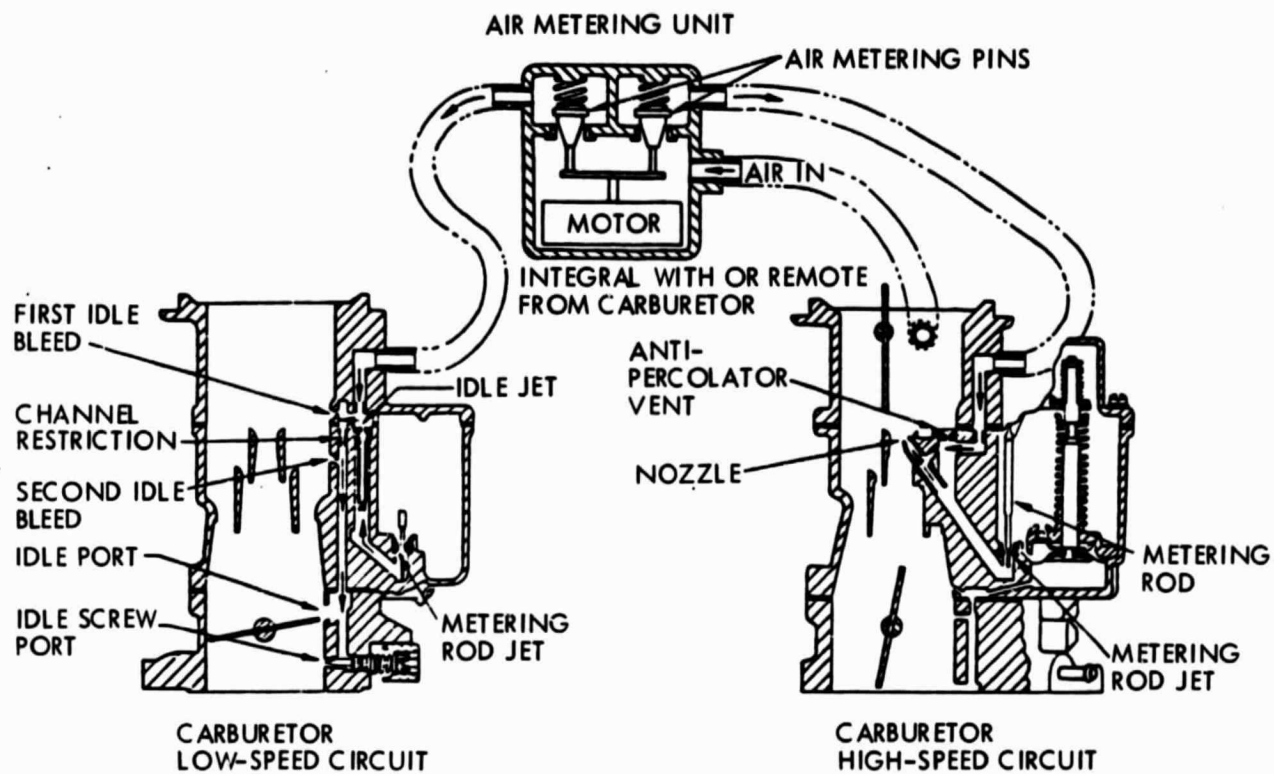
Carburetor Fuel Circuits (Ref. 16)
